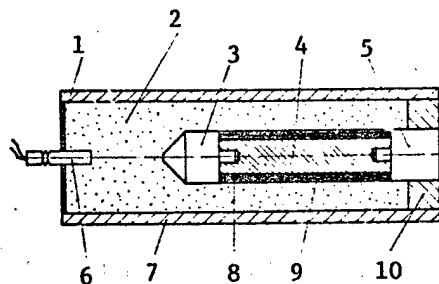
Configuration for explosive welding of fiber reinforced hollow bodies.
